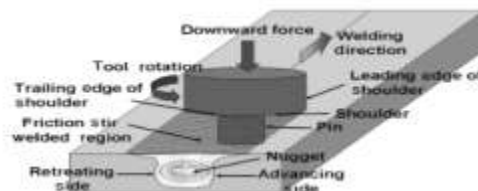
Schematic workings of friction stir welding [4]
